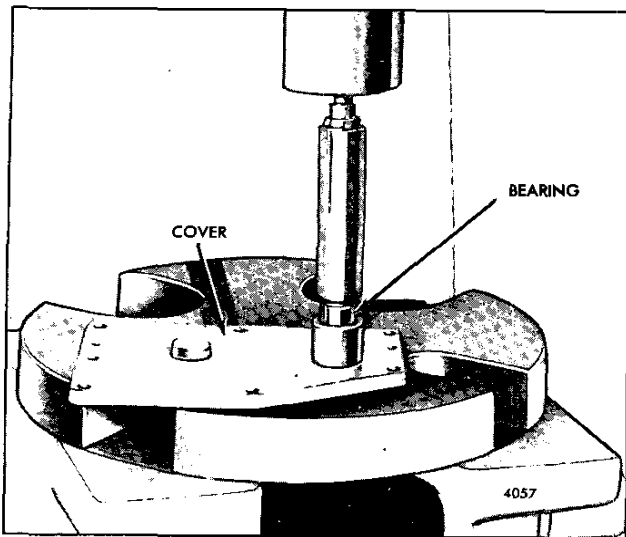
Installing Governor Cover Bearings Using Tool J 21068
